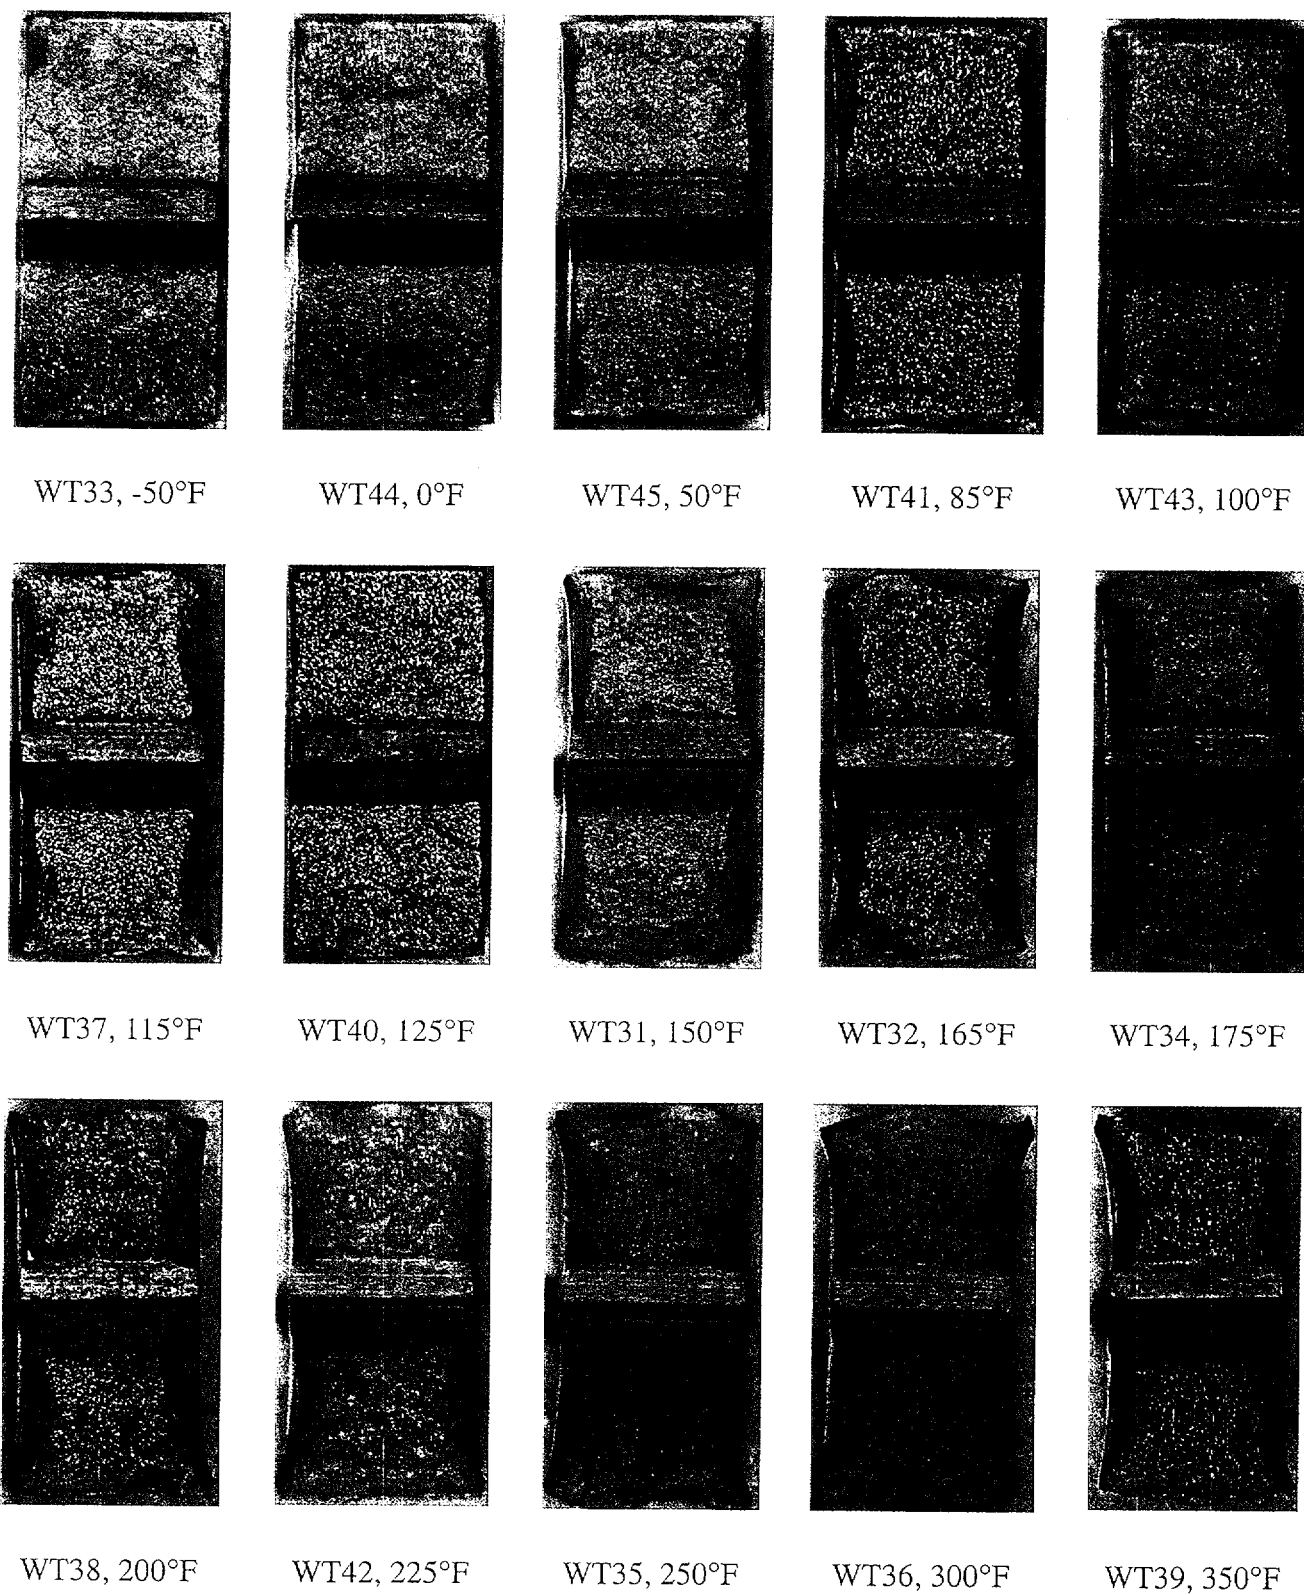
Charpy Impact Specimen Fracture Surfaces for Beaver Valley Unit 2 Reactor Vessel Intermediate Shell Plate B9004-2 (Transverse Orientation)
